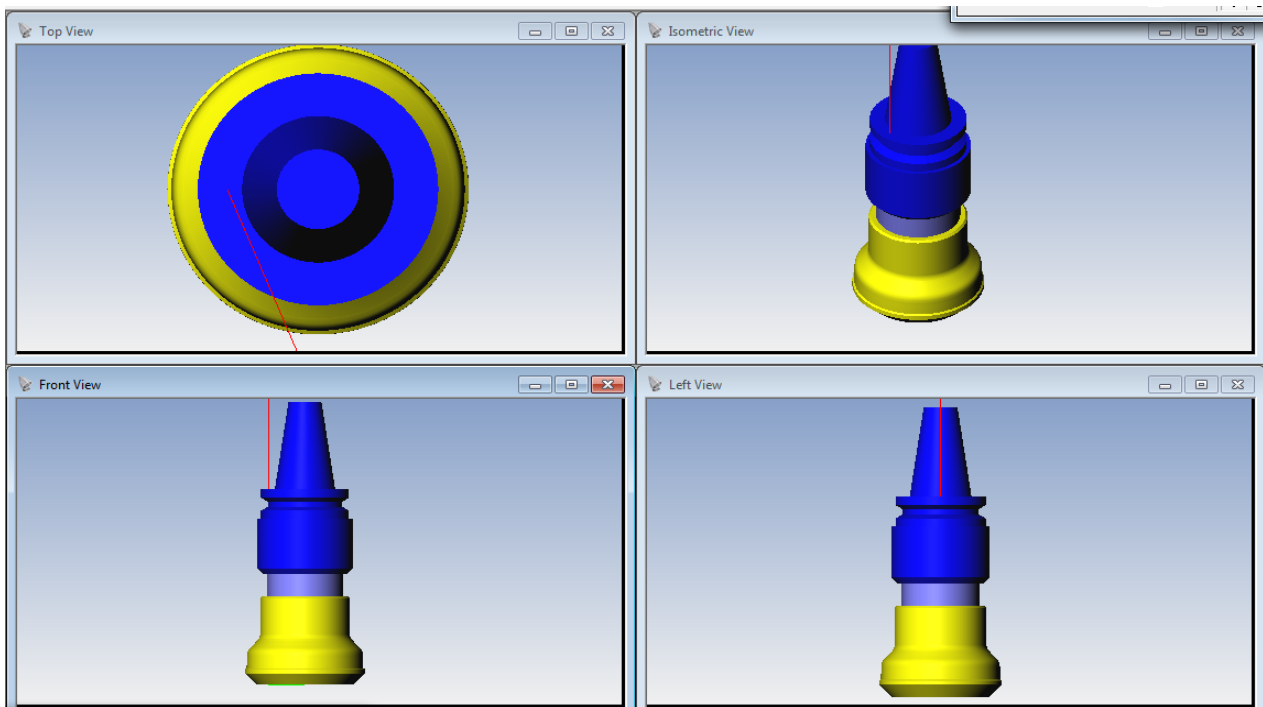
Cutting tool views: Top, isometric, front, left.
